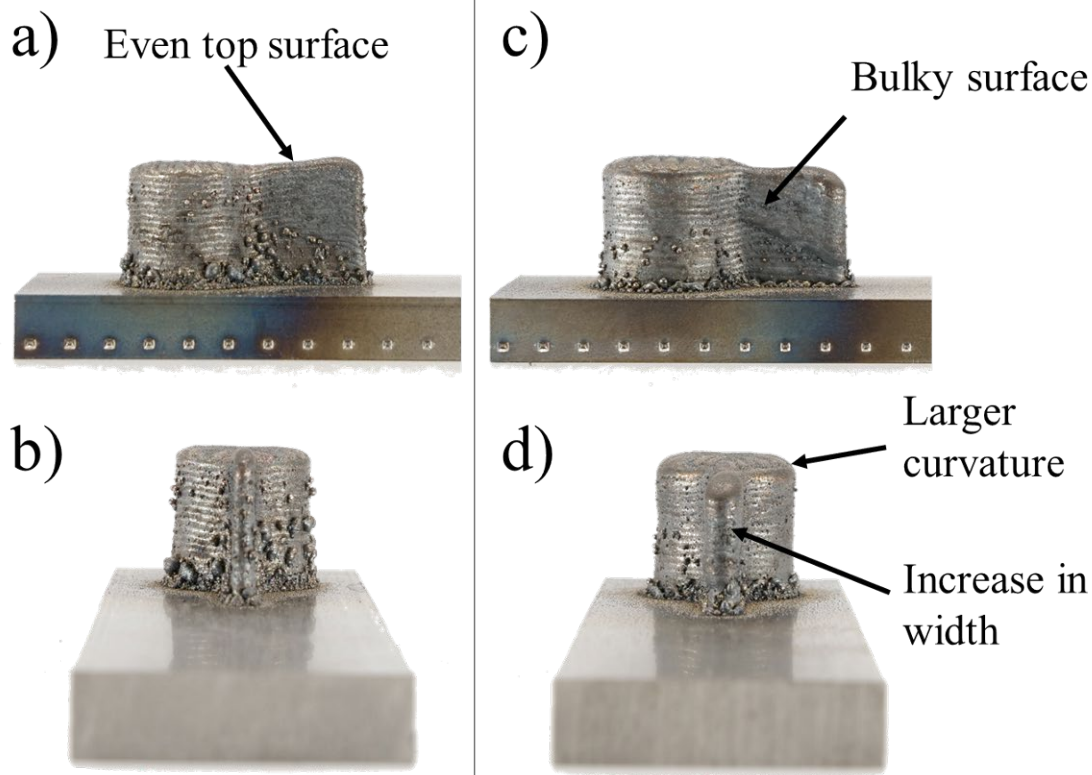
Visual inspection of the single wing demonstrator a) side view and b) front view with adapted laser power c) side view and d) front view with constant laser power.
